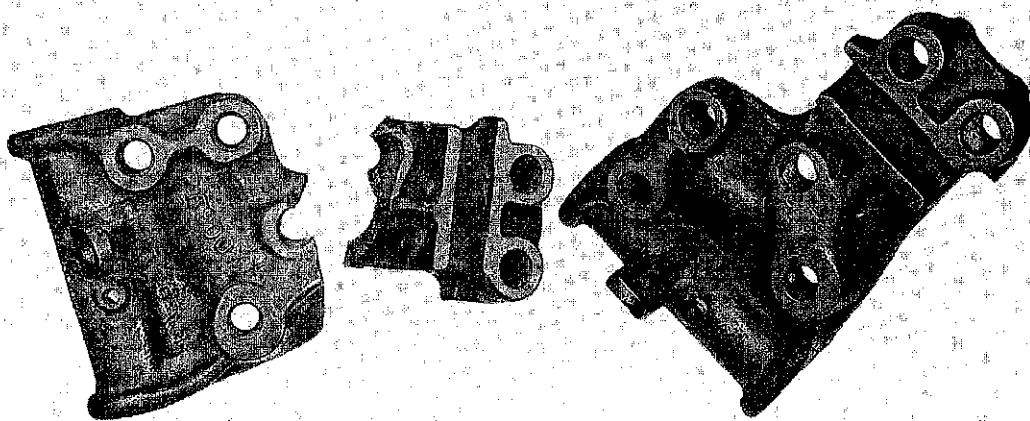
FRACTURED CAST IRON AXLE BRACKET OF PLOUGH BEFORE AND AFTER
